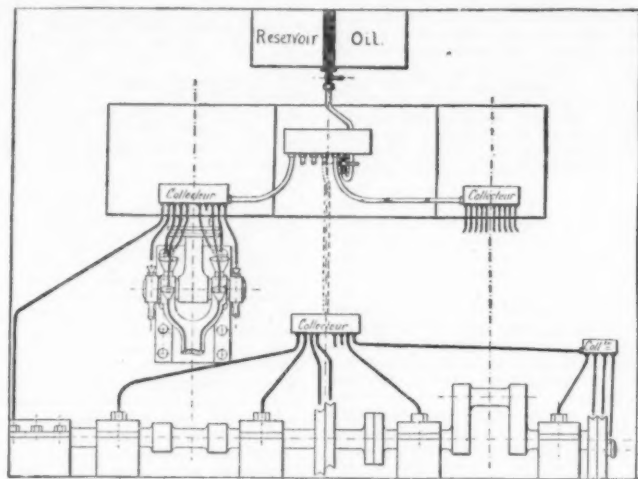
DETAILS OF A LUBRICATING INSTALLATION.
